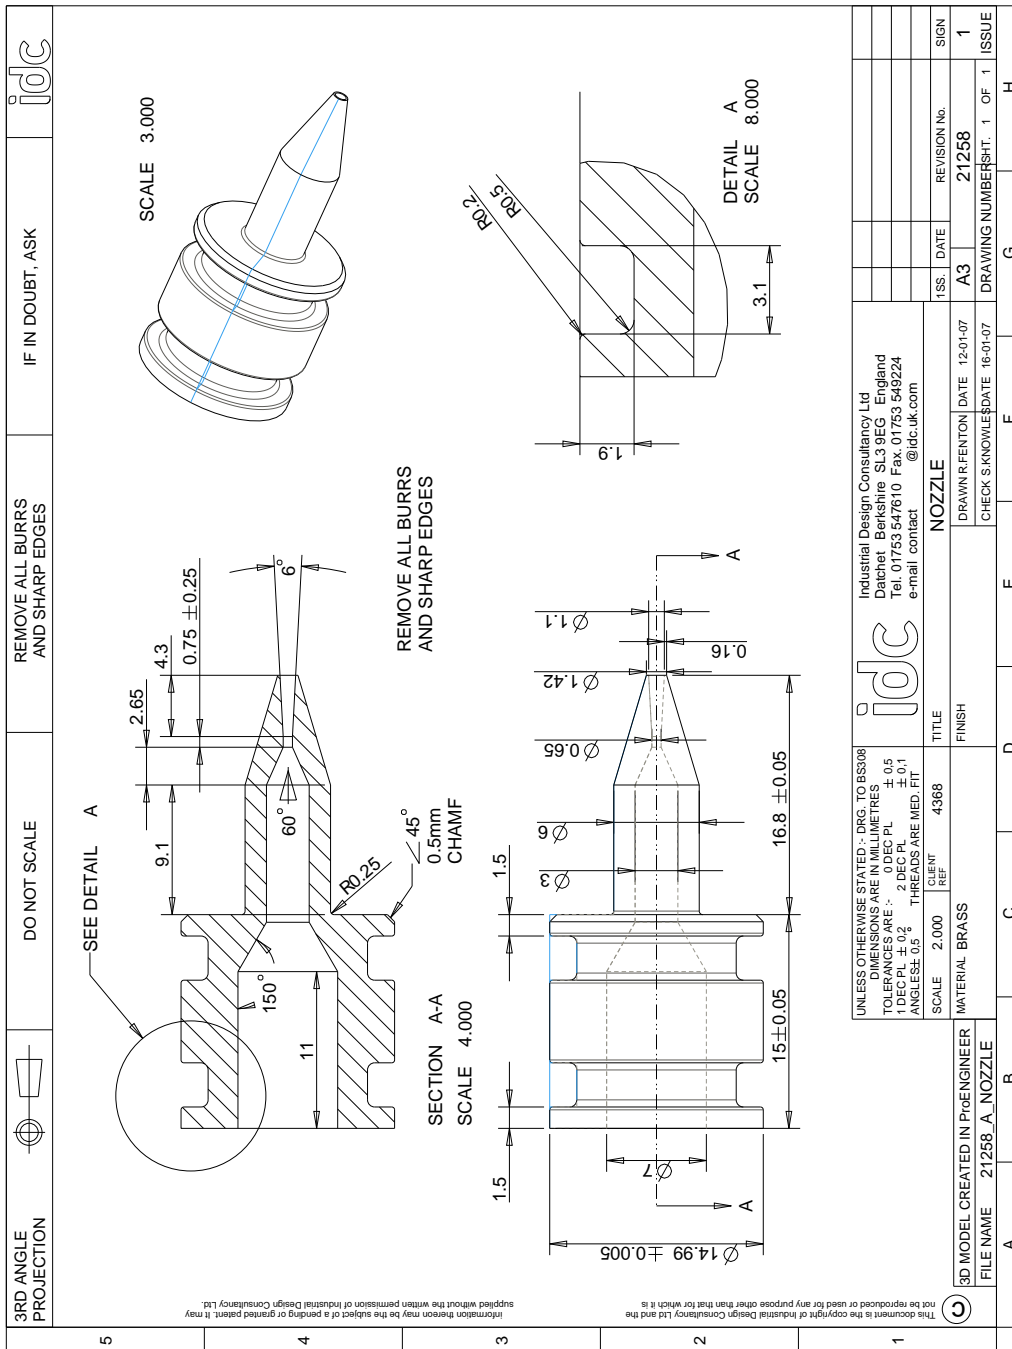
Dimensioned drawing of the jet-pump nozzle
